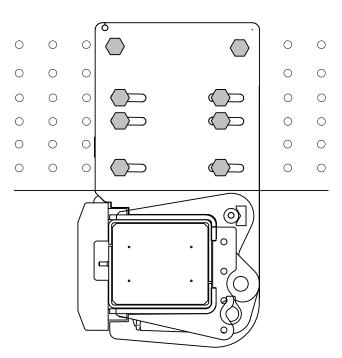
Installing the chassis bracket on vehicle chassis with pre-drilled holes
